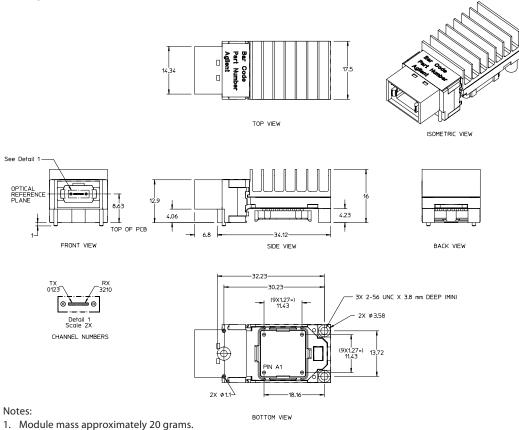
A. HFBR-7924 Package dimensions (dimensions in mm)
